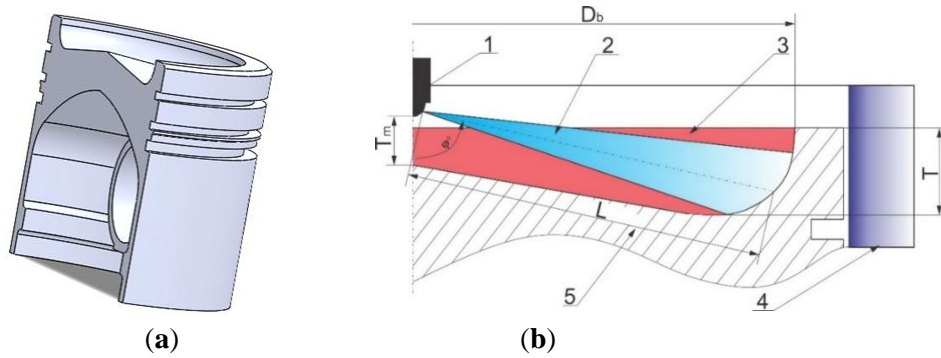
Geometry of piston bowl shape: (a) 3D piston; (b) Basic parameters of the piston. 1—Nozzle; 2—Spray; 3—Combustion chamber; 4—Cylinder; 5—Piston.
